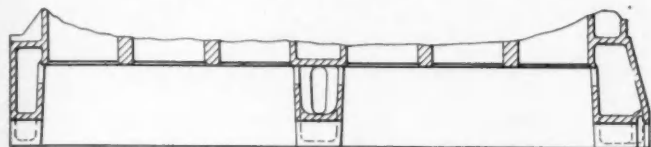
DESIGN SHOWING IMPROVED CONSTRUCTION FOR BEARING SUPPORTS
